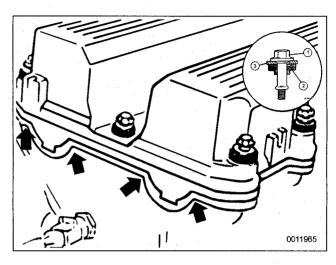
Rear of cylinder head cover showing area where sealant (arrows) should be applied. Inset shows cylinder head cover mounting bolt and insulator assembly: M6 screw (1), rubber damper (2), washer (3).
